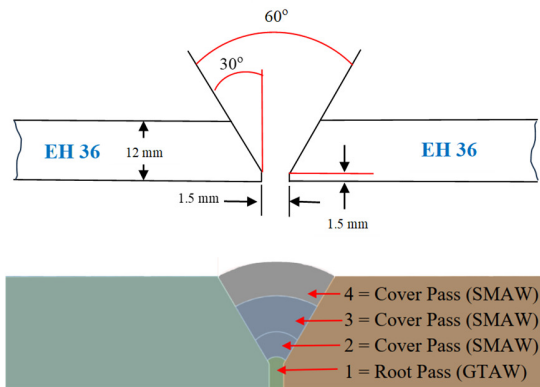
Dimensions of two steel plates and hybrid welding procedure.
